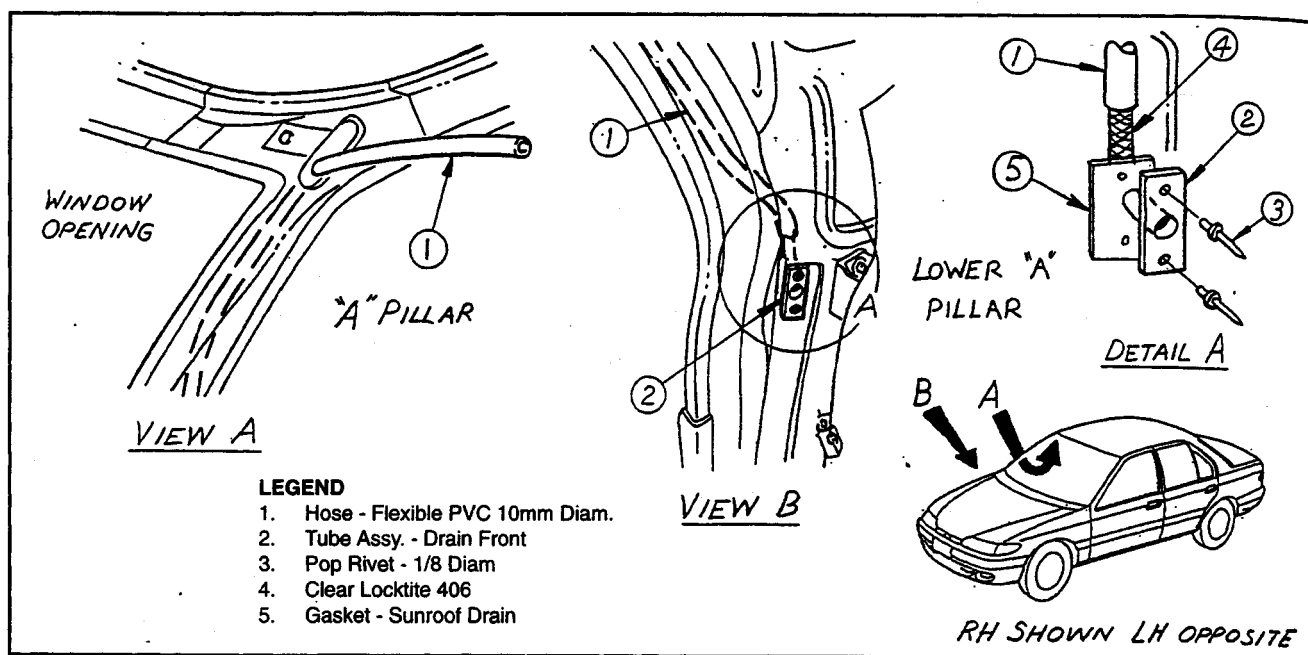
Hollandia Sunroof Installation - Short Wheel Base.
